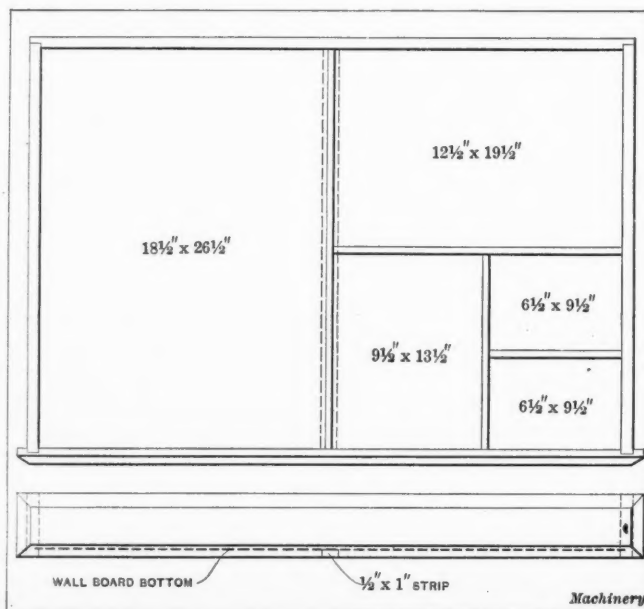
Design of Drawer equipped with Upsen Wall Board Bottom
